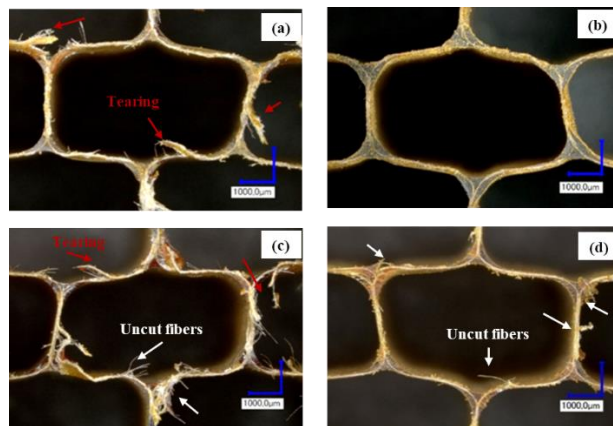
Obtained honeycomb machining surfaces. The case (b) represents the best milling result
